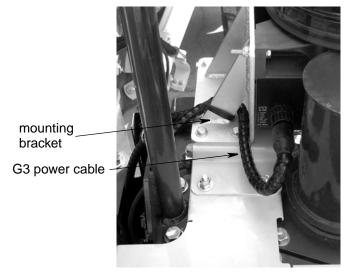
PC210-11/PC240-11/PC290-11 Models
